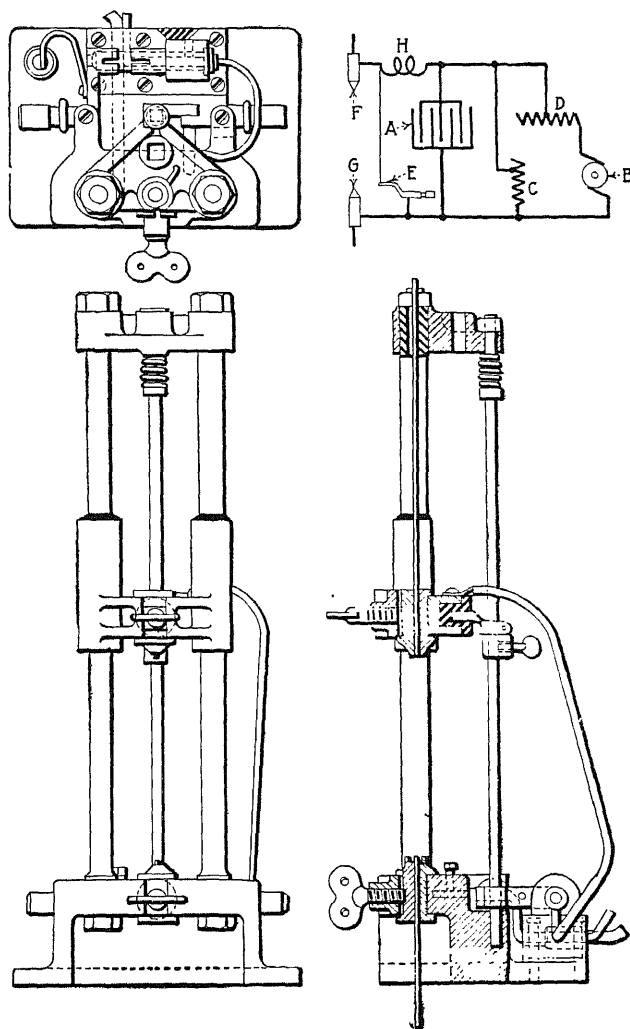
Details of Percussive Welding Machine and Wiring Diagram.
